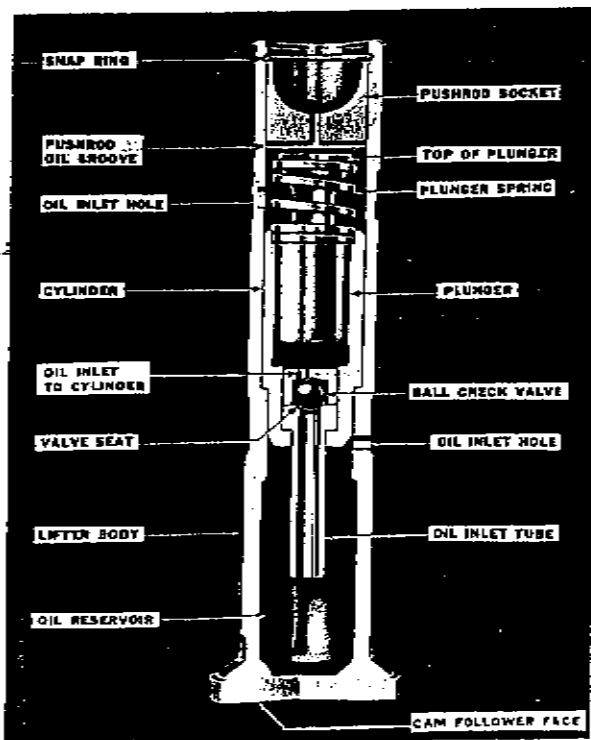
Cutaway View of Hydraulic Valve Lifter
